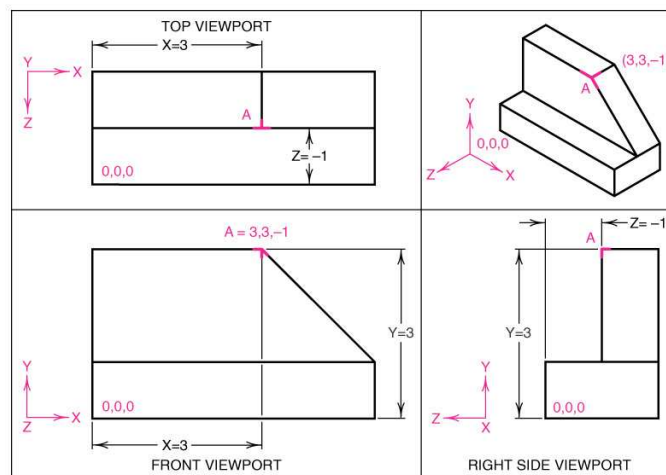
Display of coordinate axes in a multiview CAD drawing
